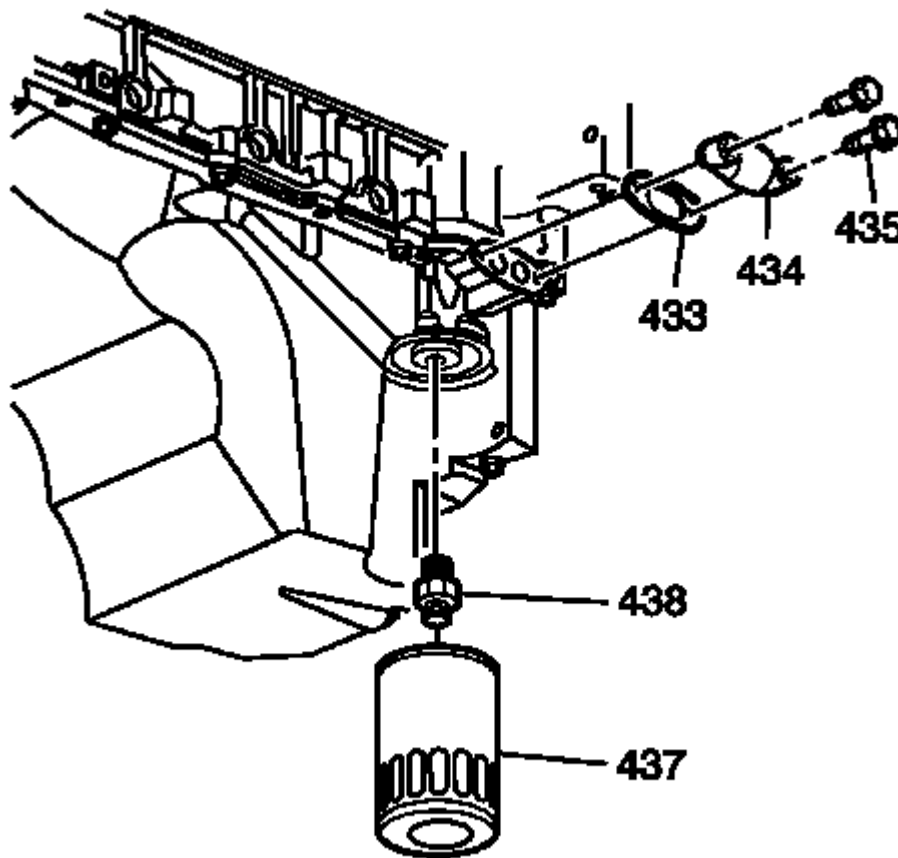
Identifying Oil Pan Cover, Bolts, Gasket And Oil Filter Fitting
